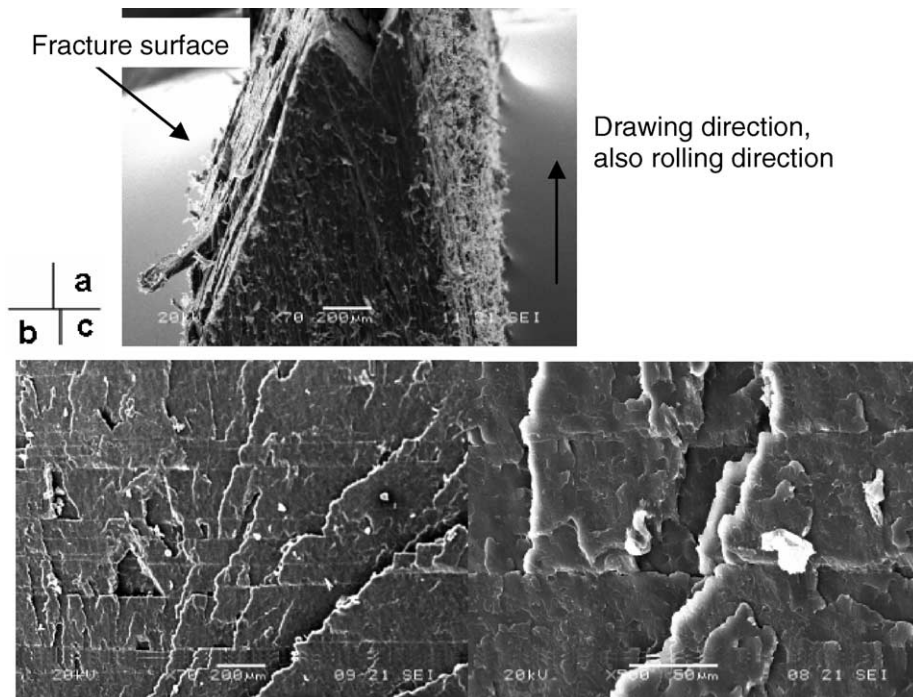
Fractured surface observed by SEM, specimen was deformed by side-constraint rolling at DR=3.94. (a) Side view shows a regular fracture at an acute angle of 26° (b) fractured surface shows some regular horizontal lines (c) magnified fractured surface of (b).
